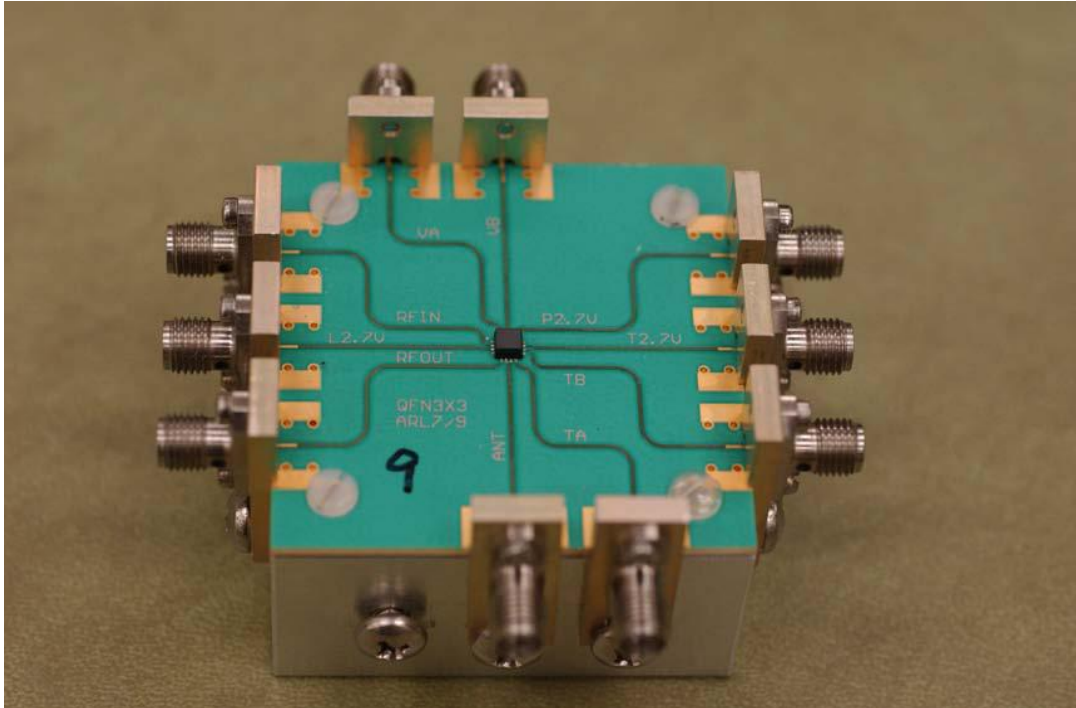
Example of QFN package and PC board on test block with SMA connectors.
